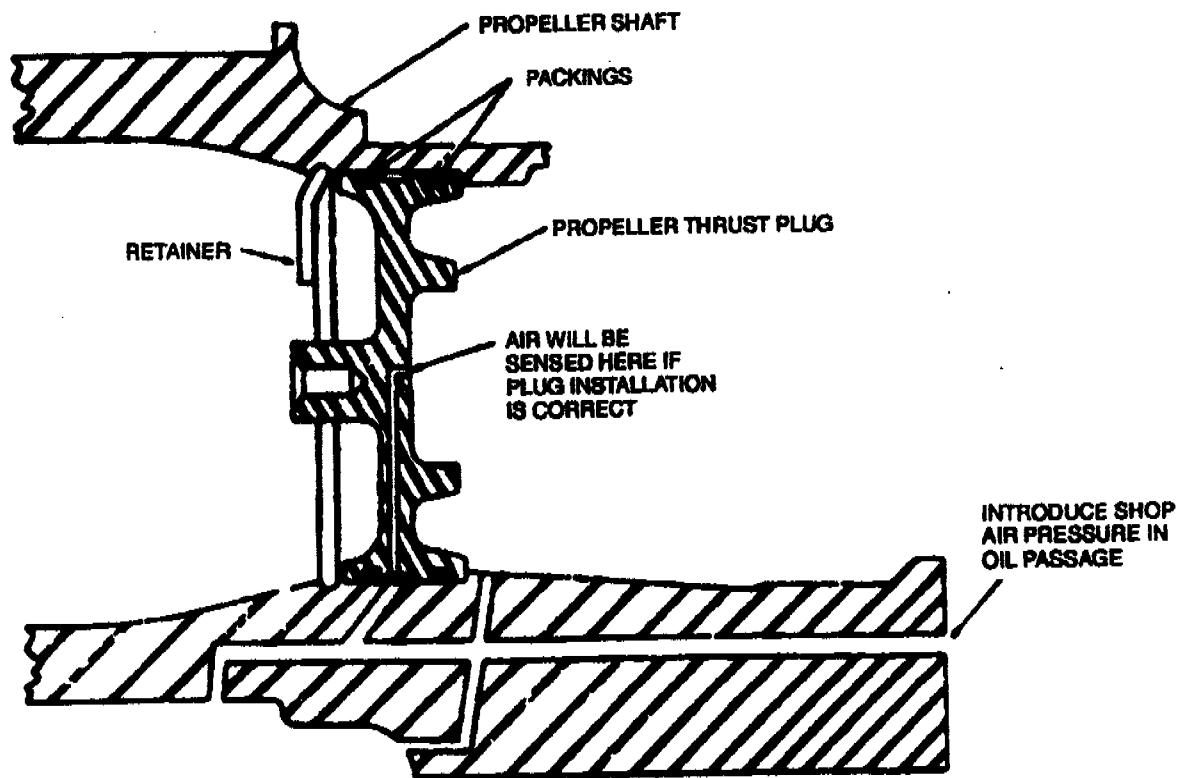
Propeller Thrust Plug Installation (T53-L-15).
